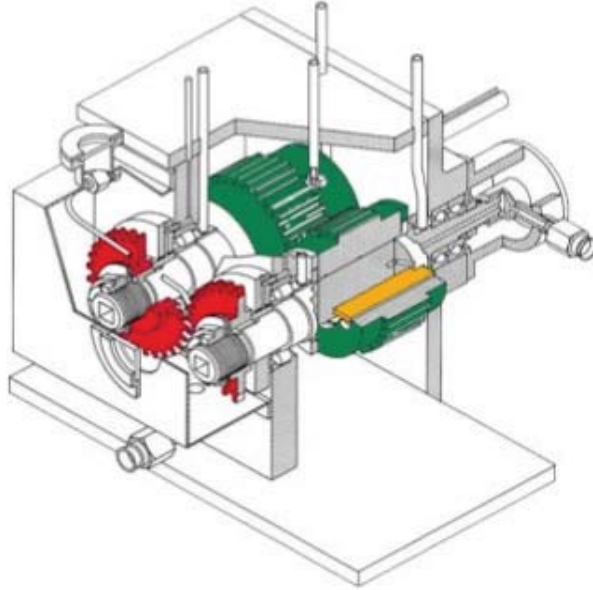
Cross-sectional sketch of the test gearbox used for loss of lubrication testing.
